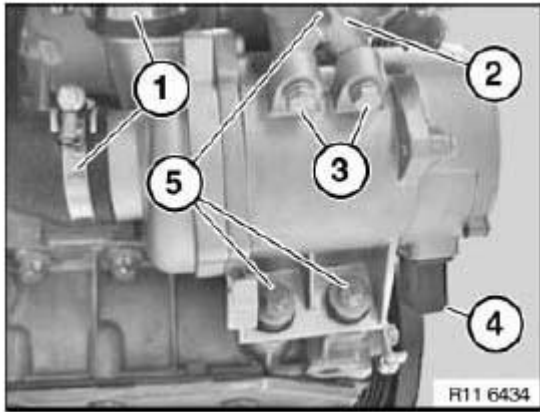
Identifying Water Hose, Plug Connection And Screws
